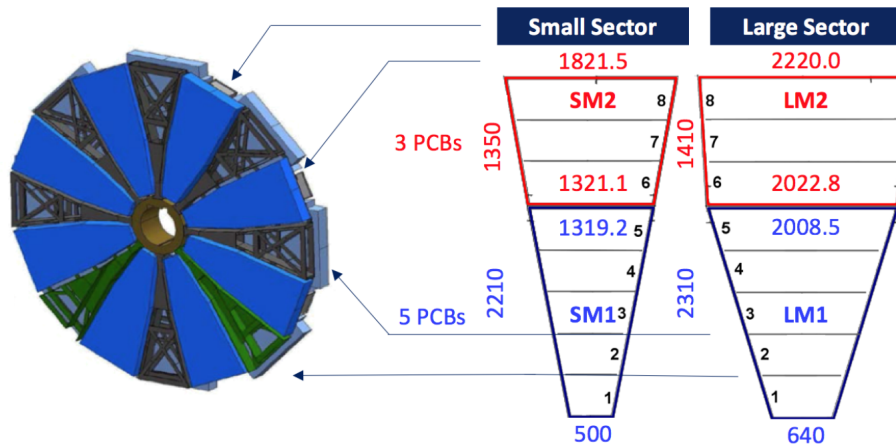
Segmentation of readout PCBs for small and large sectors into 3 or 5 RO PCBs has been required by the limited size of commercial PCBs available on the market. Indication of the dimensions are also given
